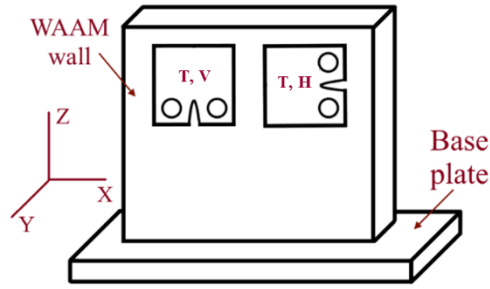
Schematic of the specimen extraction plan from the WAAM wall
